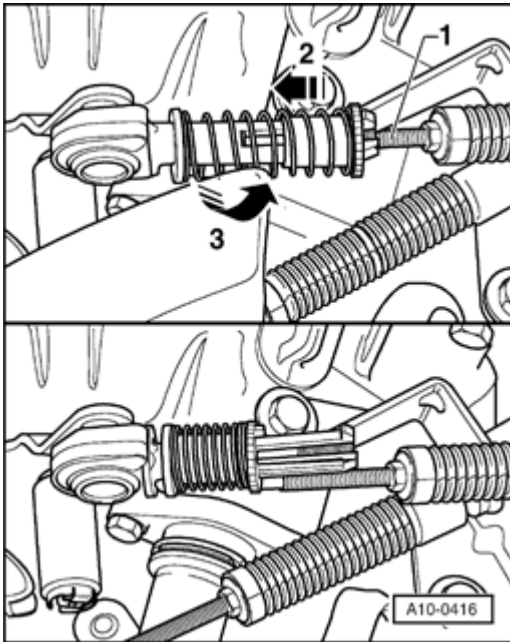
Pulling Collar (Toward Ball Joint) To Compress Spring, Then Turning Collar Clockwise To Lock In Position
